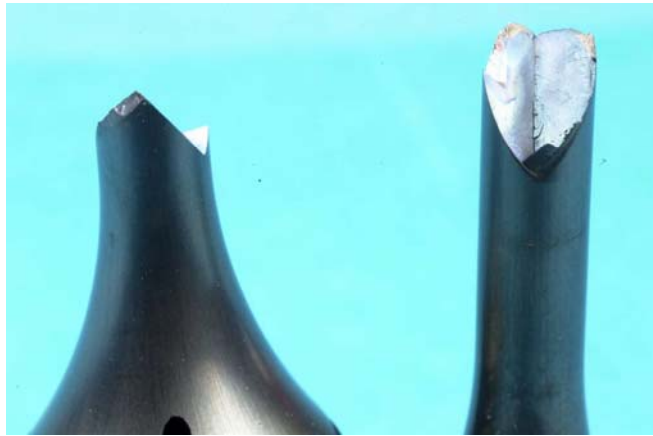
Fracture surface for R = -1; 1100°F; 1,612,914 cycles.
